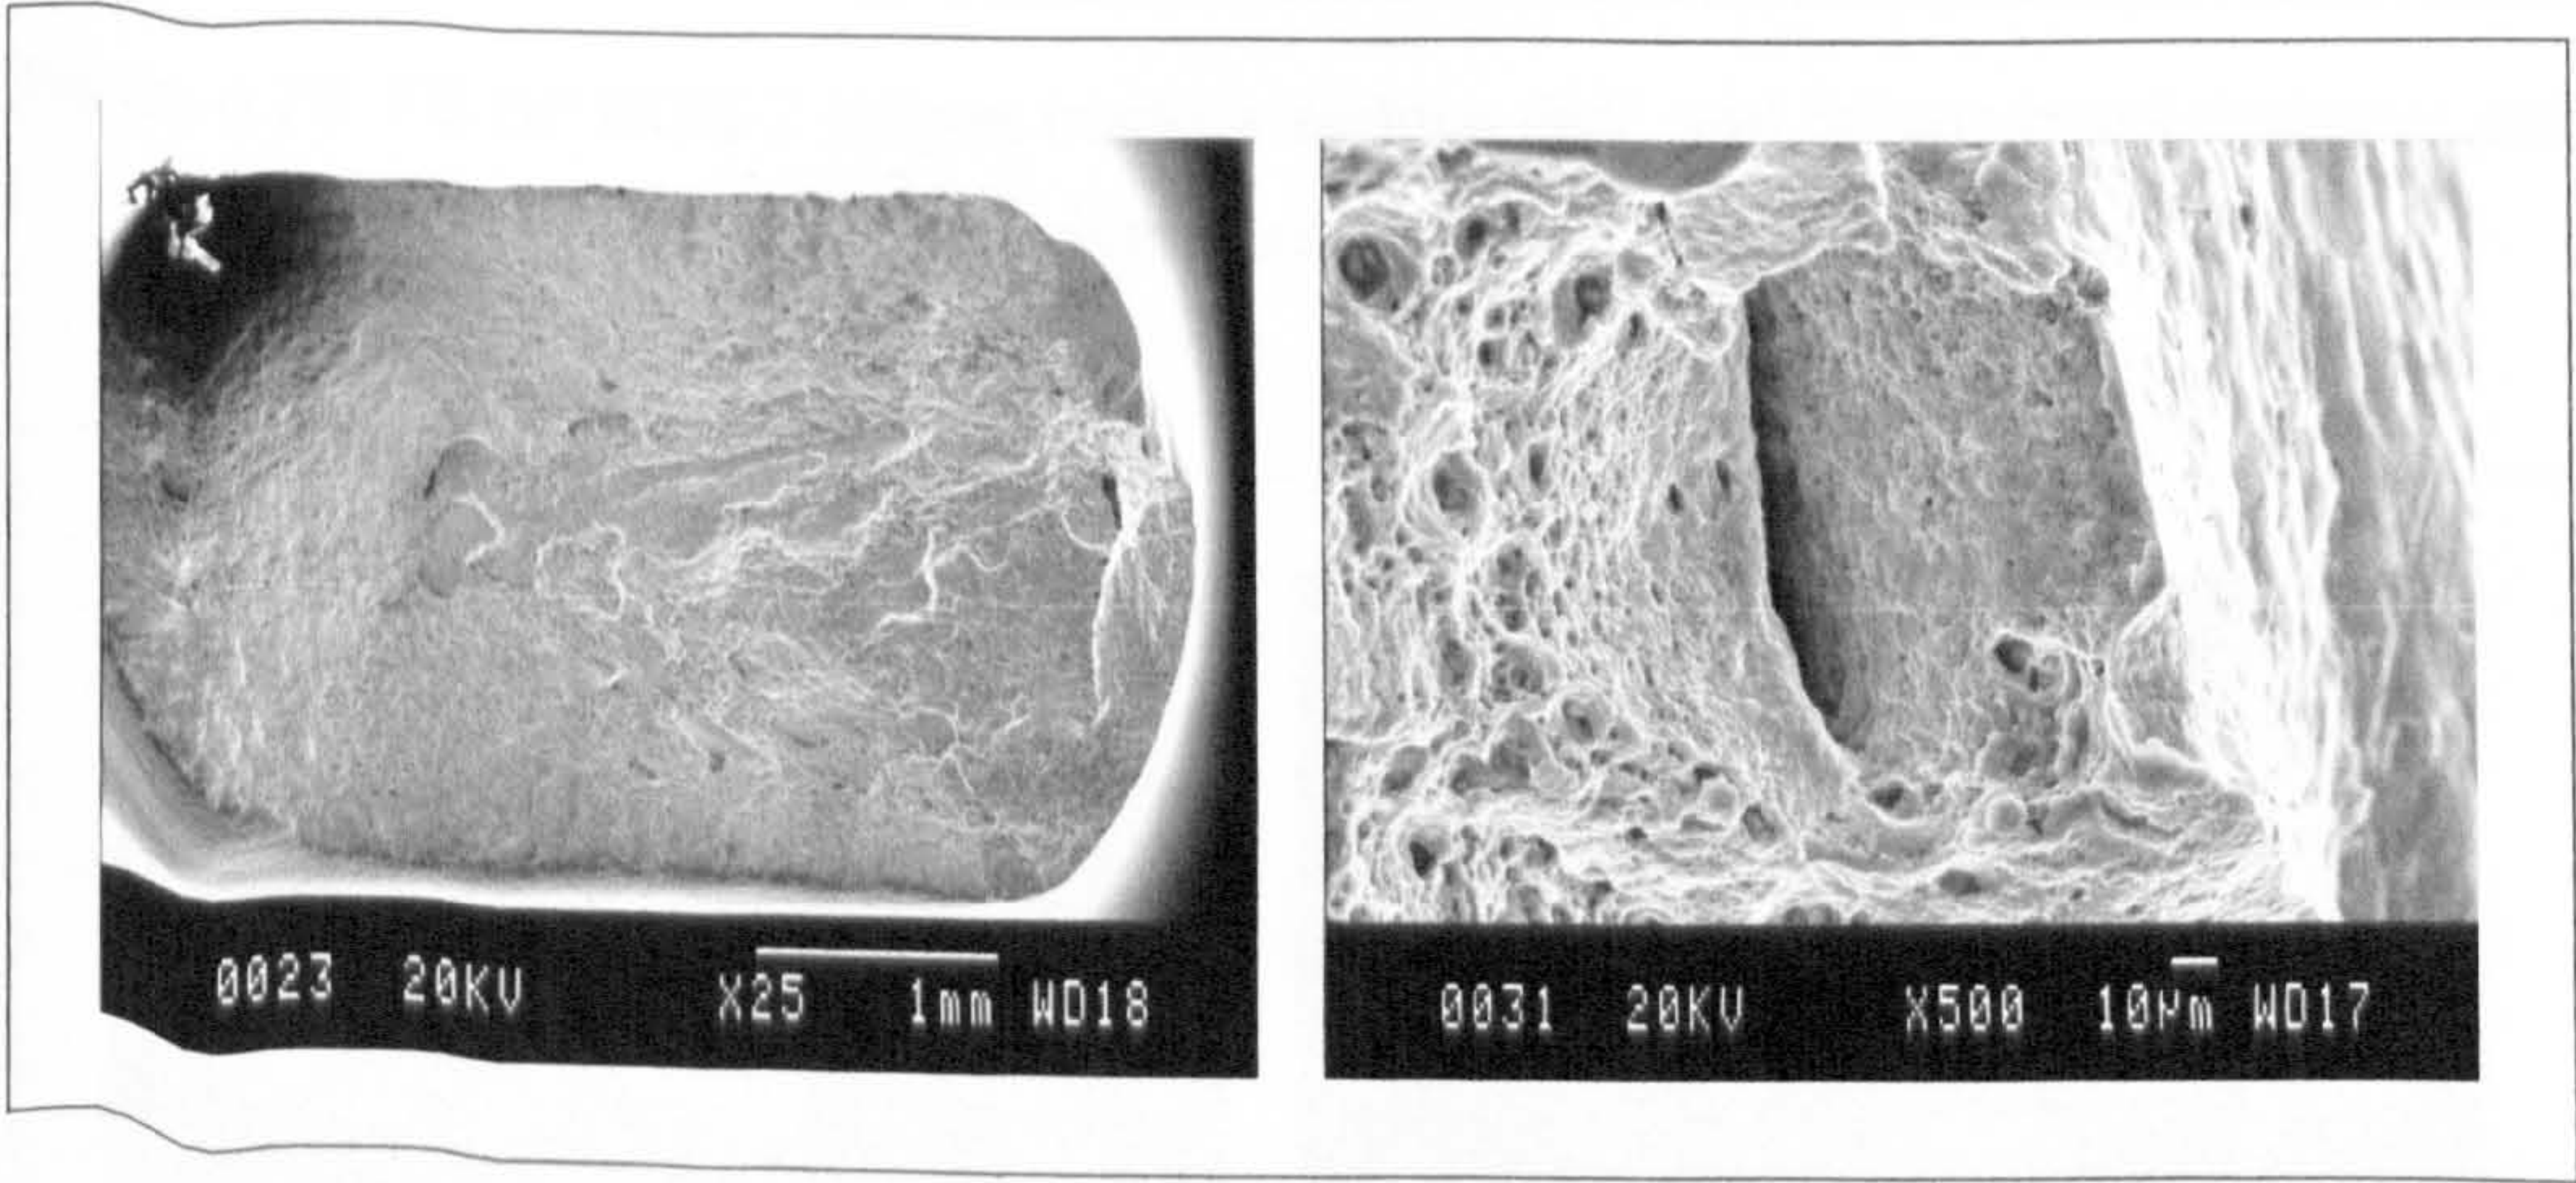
FS SP SCG 1 exhibiting PFD on the fracture surface.
